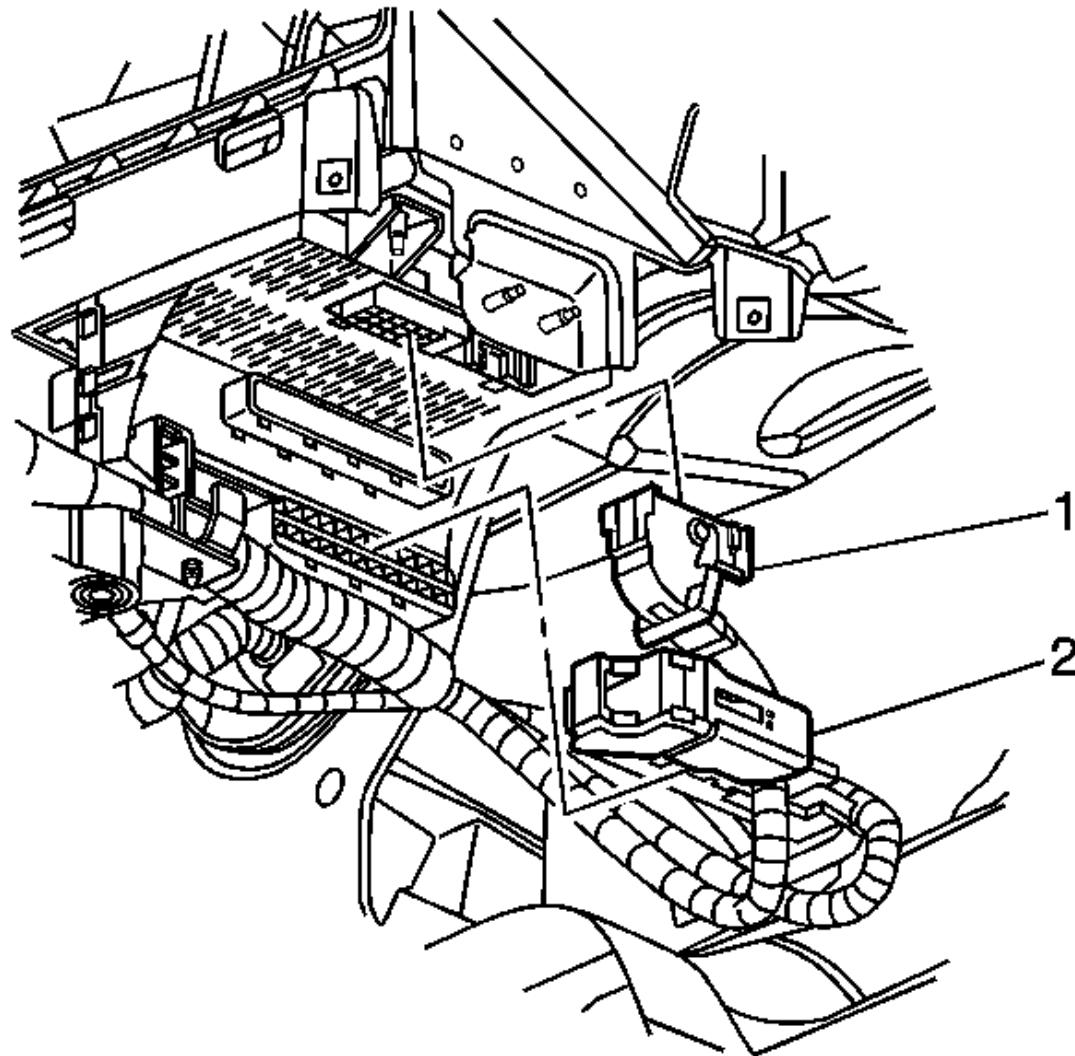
View Of Wiring Harness Center Support Bracket
